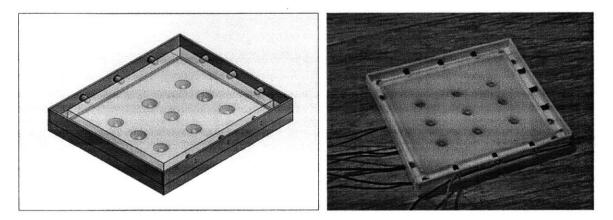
Final CAD design and physical assembly of prototype touch surface keyboard
